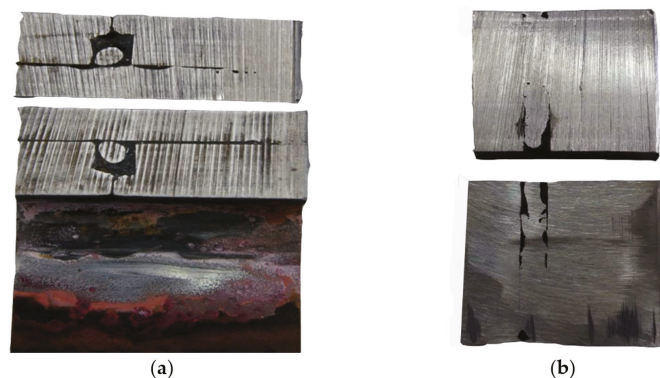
The extensiveness of the inclusion analyzed with the use of macroscopic examination (handy-size bulk carrier 30206 DWT): (a) surfaces created by the cut shown in Figure 11 and (b) metallurgical inclusion running parallel to the surface of part II.
